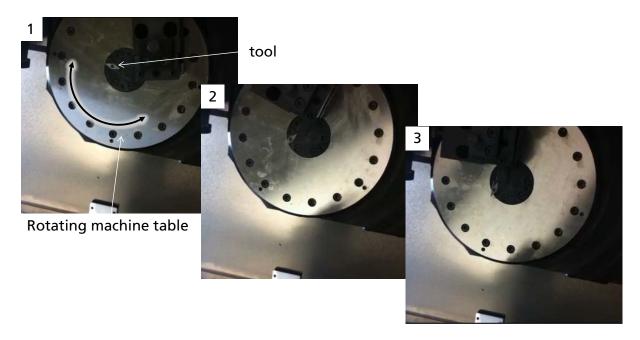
Picture of the b-axis table with a mounted tool, which rotates around its own axis
